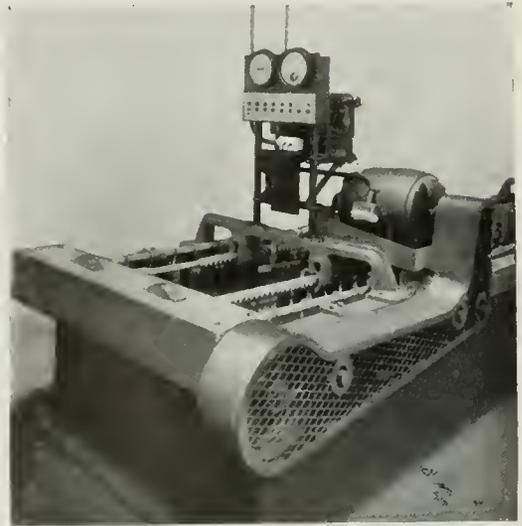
End View of Spiral Conveyer Plating Machine showing Pedestal for Regulating Plating Voltage and Speed of Conveyer
